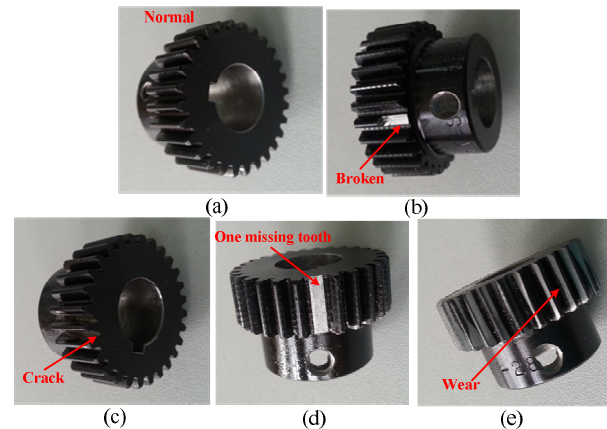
Common faulty sun gears: (a) Normal gear; (b) broken gear; (c) gear with a tooth root crack; (d) gear with one missing tooth; (e) gear with wear.
